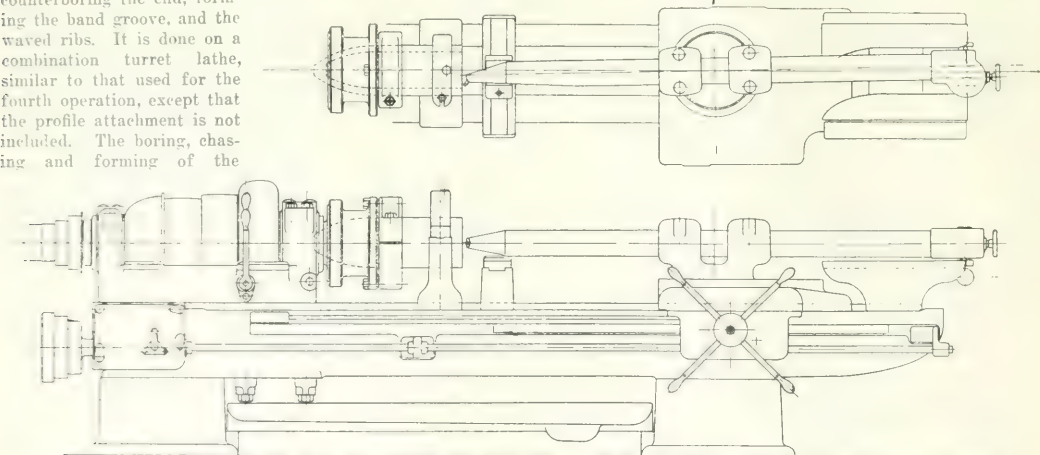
SIDE AND FRONT DRAWING OF SPECIAL LATHE FOR BORING 92 IN. HIGH EXPLOSIVE HOWITZER SHELL BODIES
